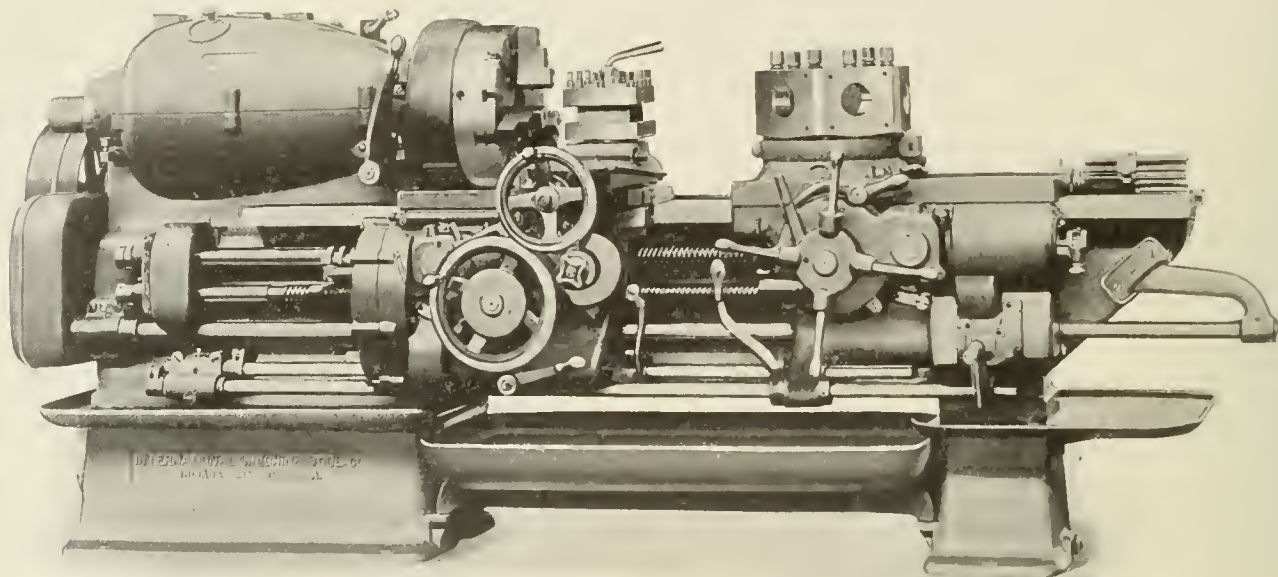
Eighteen-inch "Libby" Turret Lathe, built by the International Machine Tool Co.
